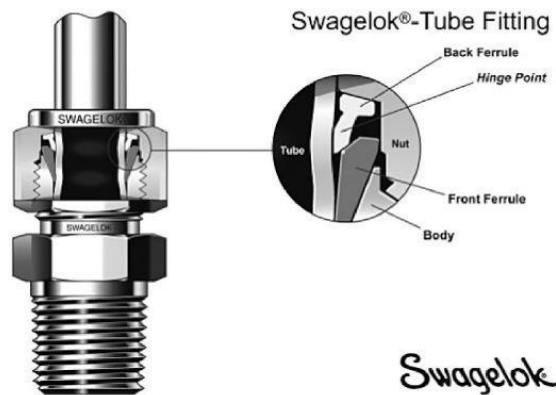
Sealing principle of a Swagelok® tube fitting (www. Swagelok.com)
